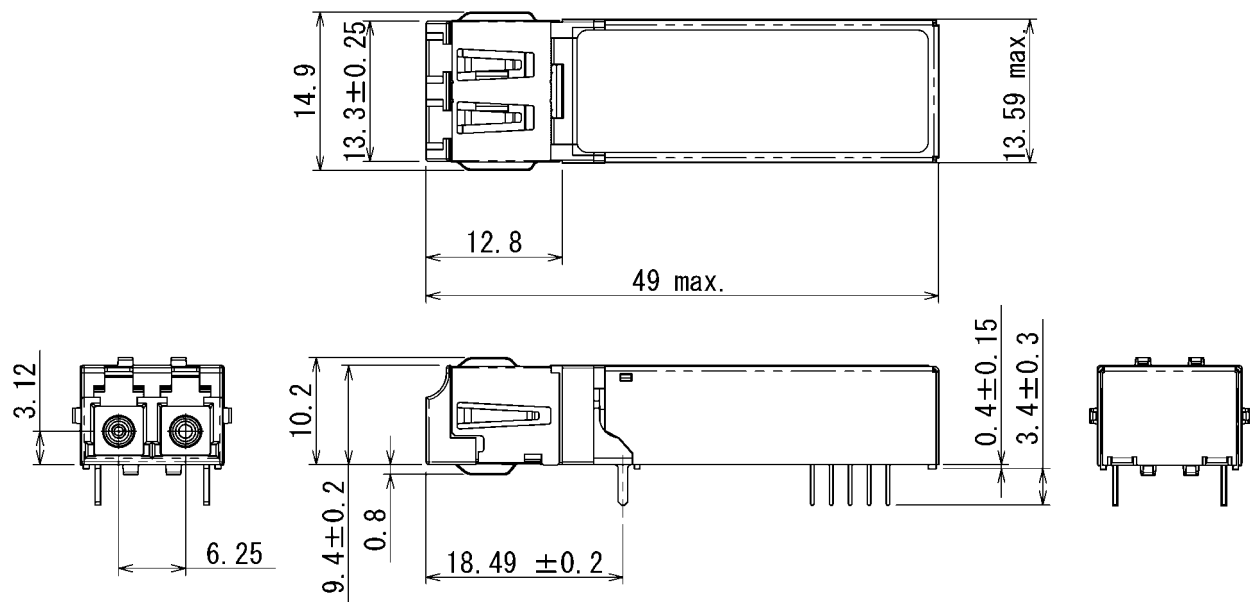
Outline Dimensions (SCM6405-JL-D#)
